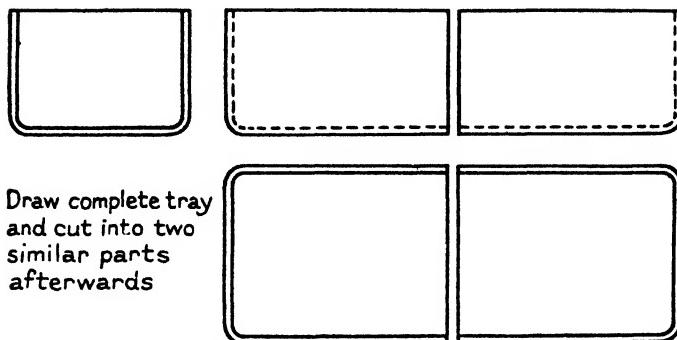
MAKING TWO PARTS AT A TIME BY DRAWING PROCESS
